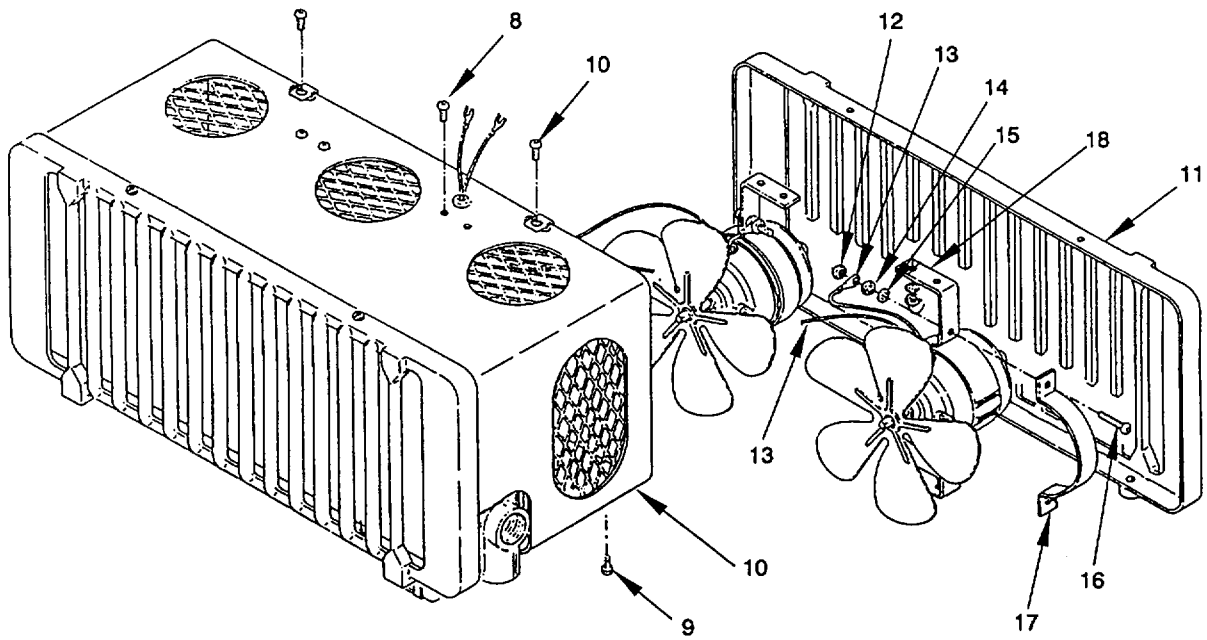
Heater and Heater Valve, Remove/Install (Sheet 2 of 2).
